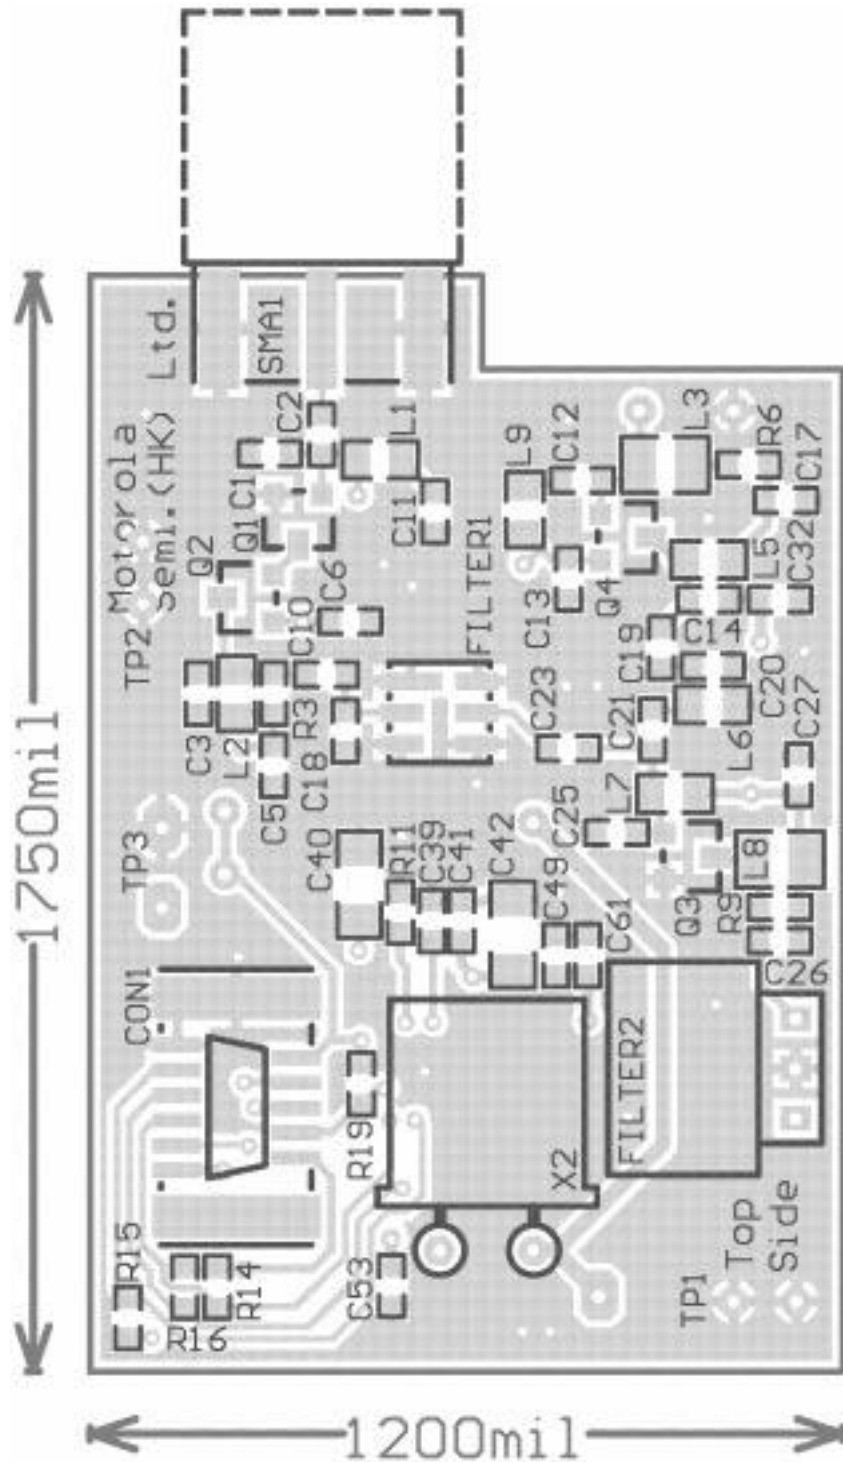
The PCB Layout of the Receiver Board (Top Layer)
